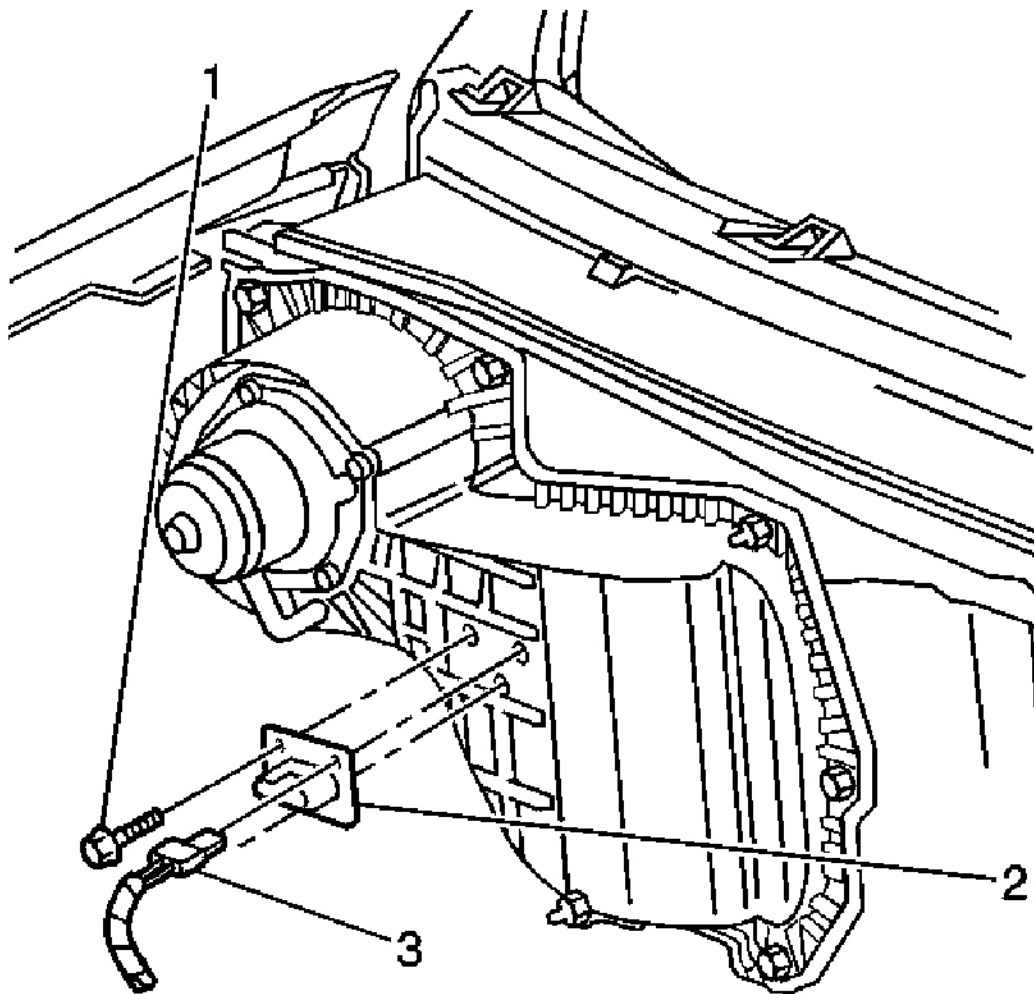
Identifying Blower Motor Resistor Assembly (C42)
